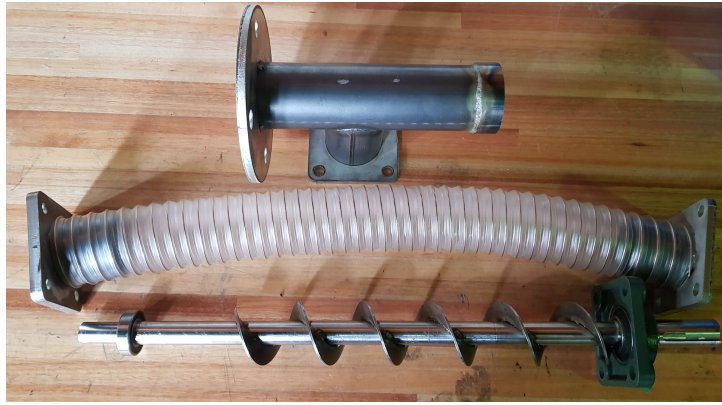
From top to bottom: Screw housing extension, flexible hose attachment, and the new screw feeder
